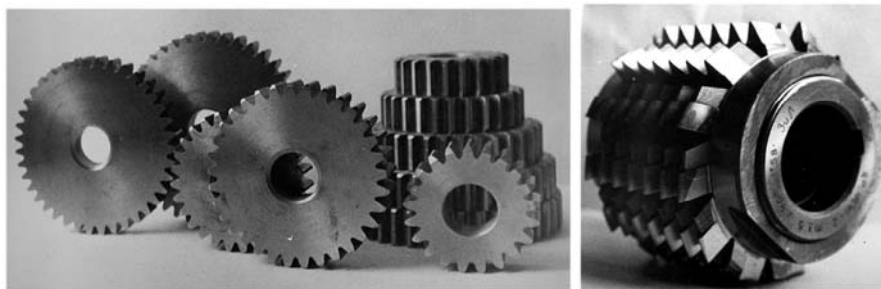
Toothed wheels with a sine profile and a worm cutter for machining such wheels
